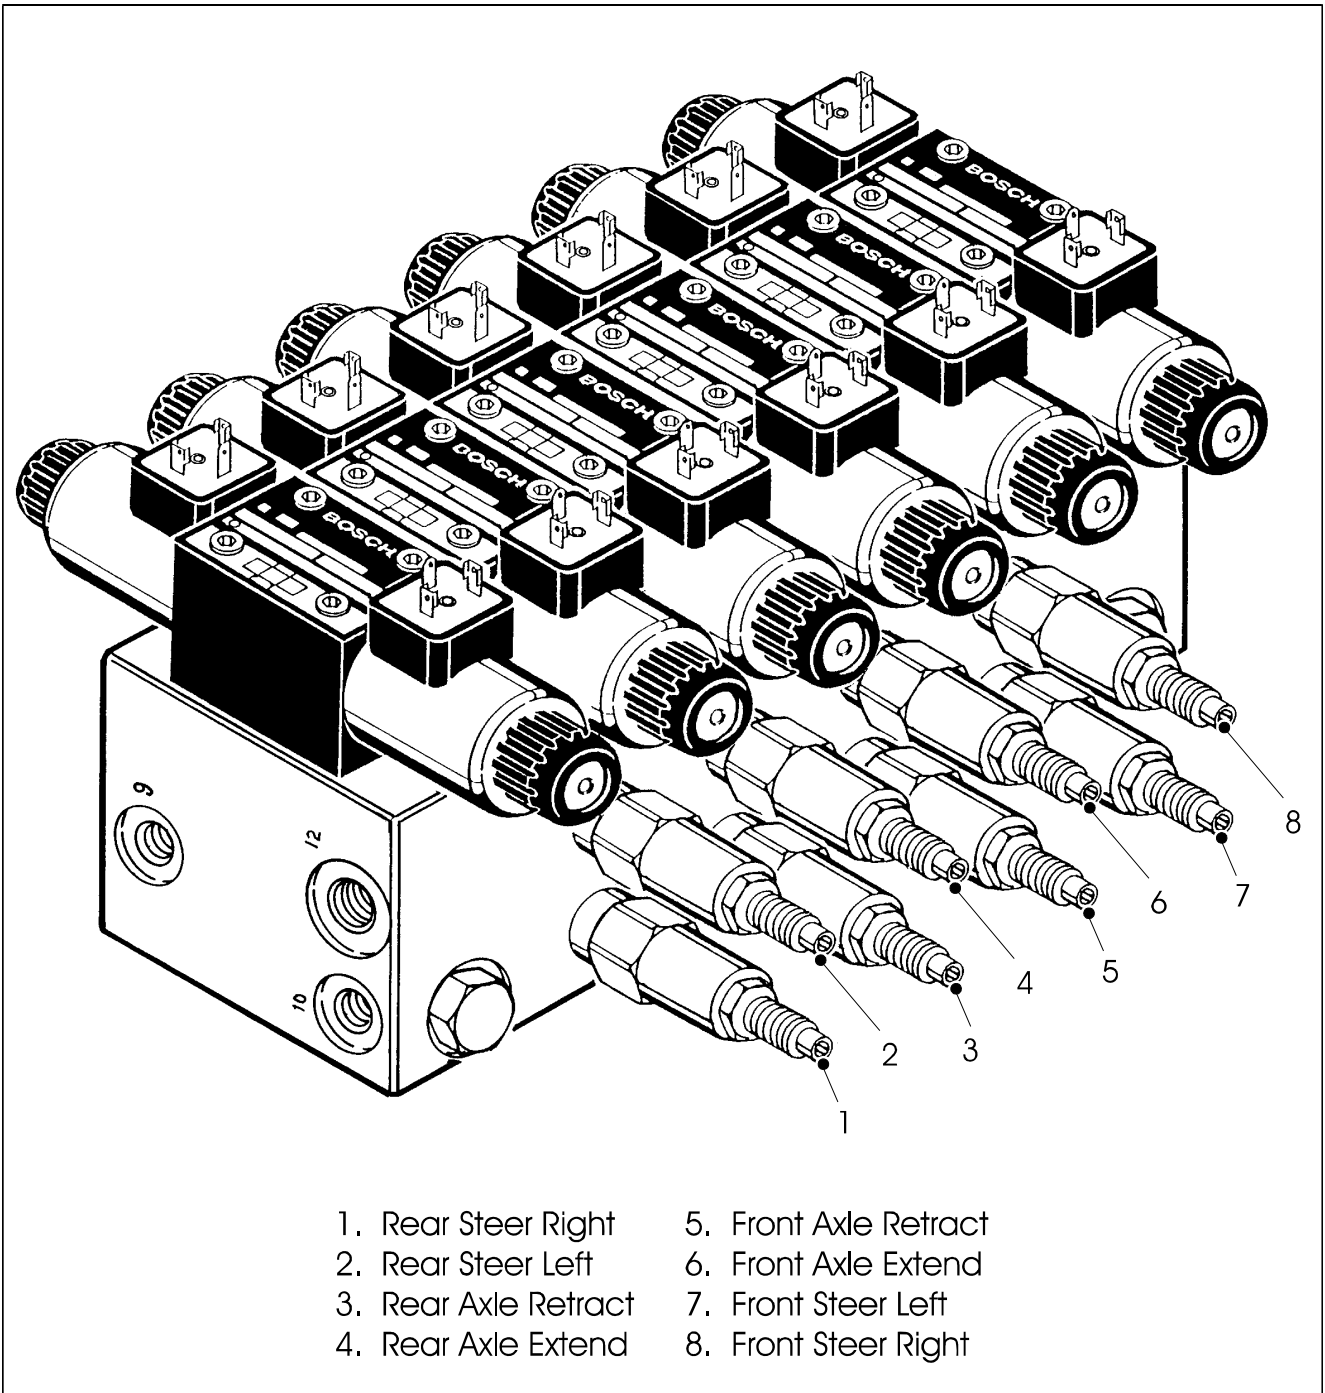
Pressure Setting Adjustments - Frame Valve - Machines Built After S/N 38697
